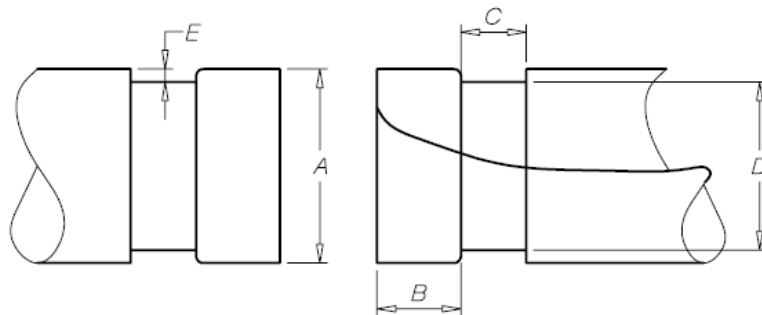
DIMENSIONS OF ROLL-GROOVED CONNECTION ENDS
